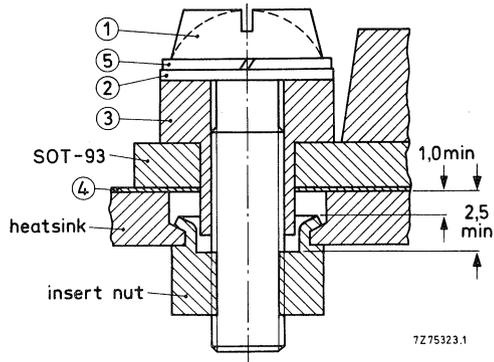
Assembly and heatsink requirements for 500 V insulation. See also Fig. 3.
